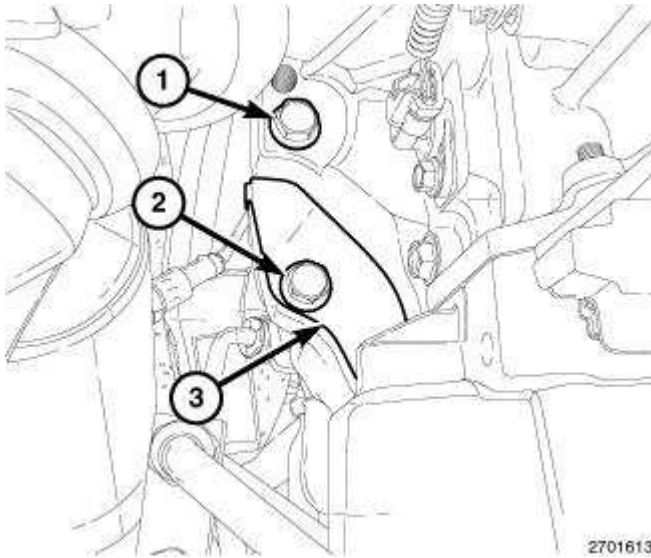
Side Engine-To-Transmission Bolt, Transmission Dust Shield Retaining Bolt & Dust Shield
